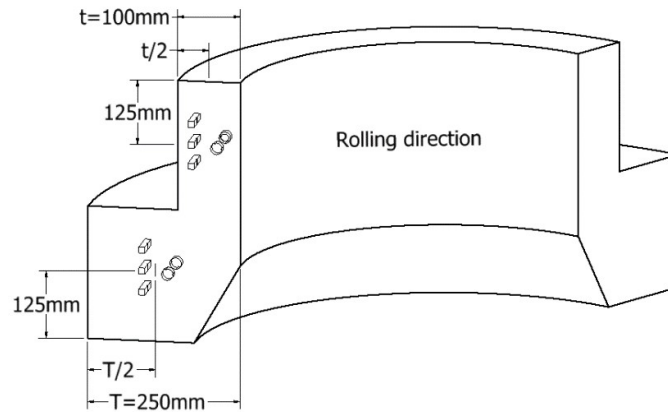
Position sampling of (a) tensile and (b) impact specimens on the ring segments.
